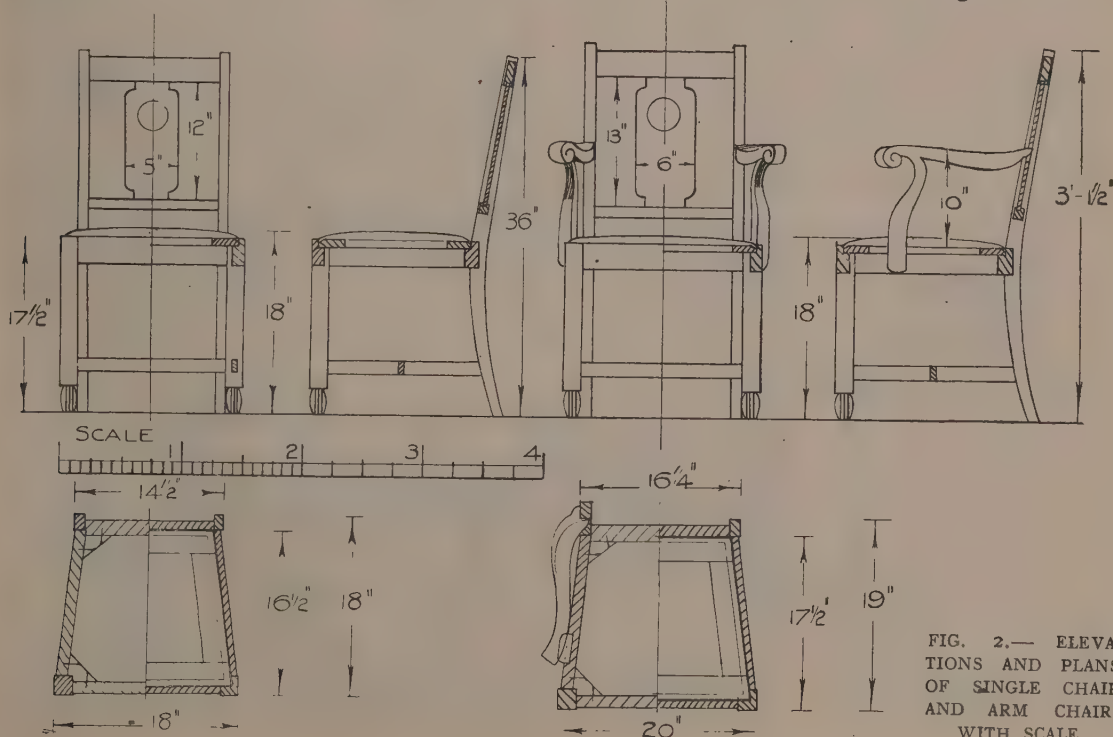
ELEVATIONS AND PLANS OF SINGLE CHAIR AND ARM CHAIR, WITH SCALE.
